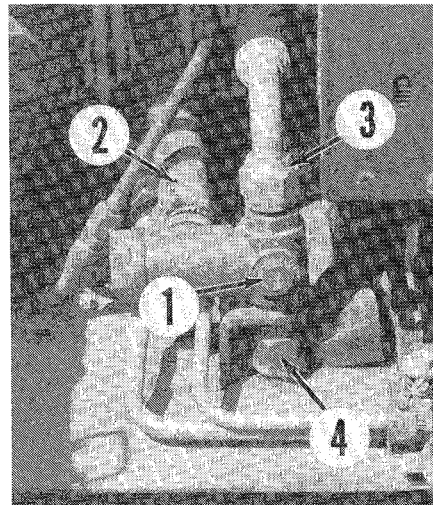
To check oil cooler inlet pressure, connect a 0-300 psi (0-2000 kPa) gage to cooler bypass valve test port (1).
